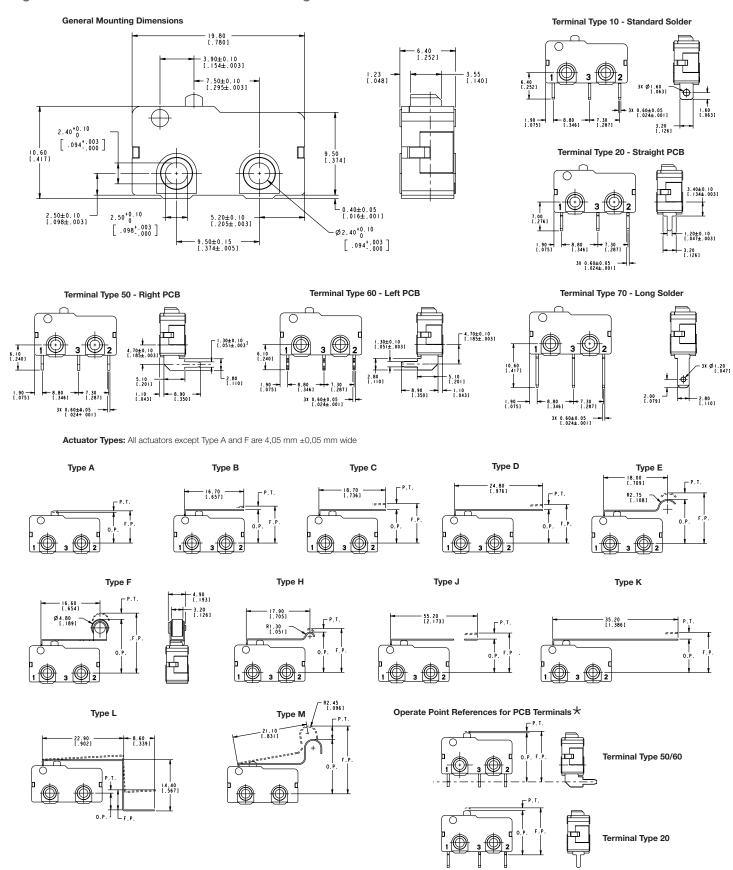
MICRO SWITCH ZM1 Series Mounting Dimensions - Internal Mount Actuator
